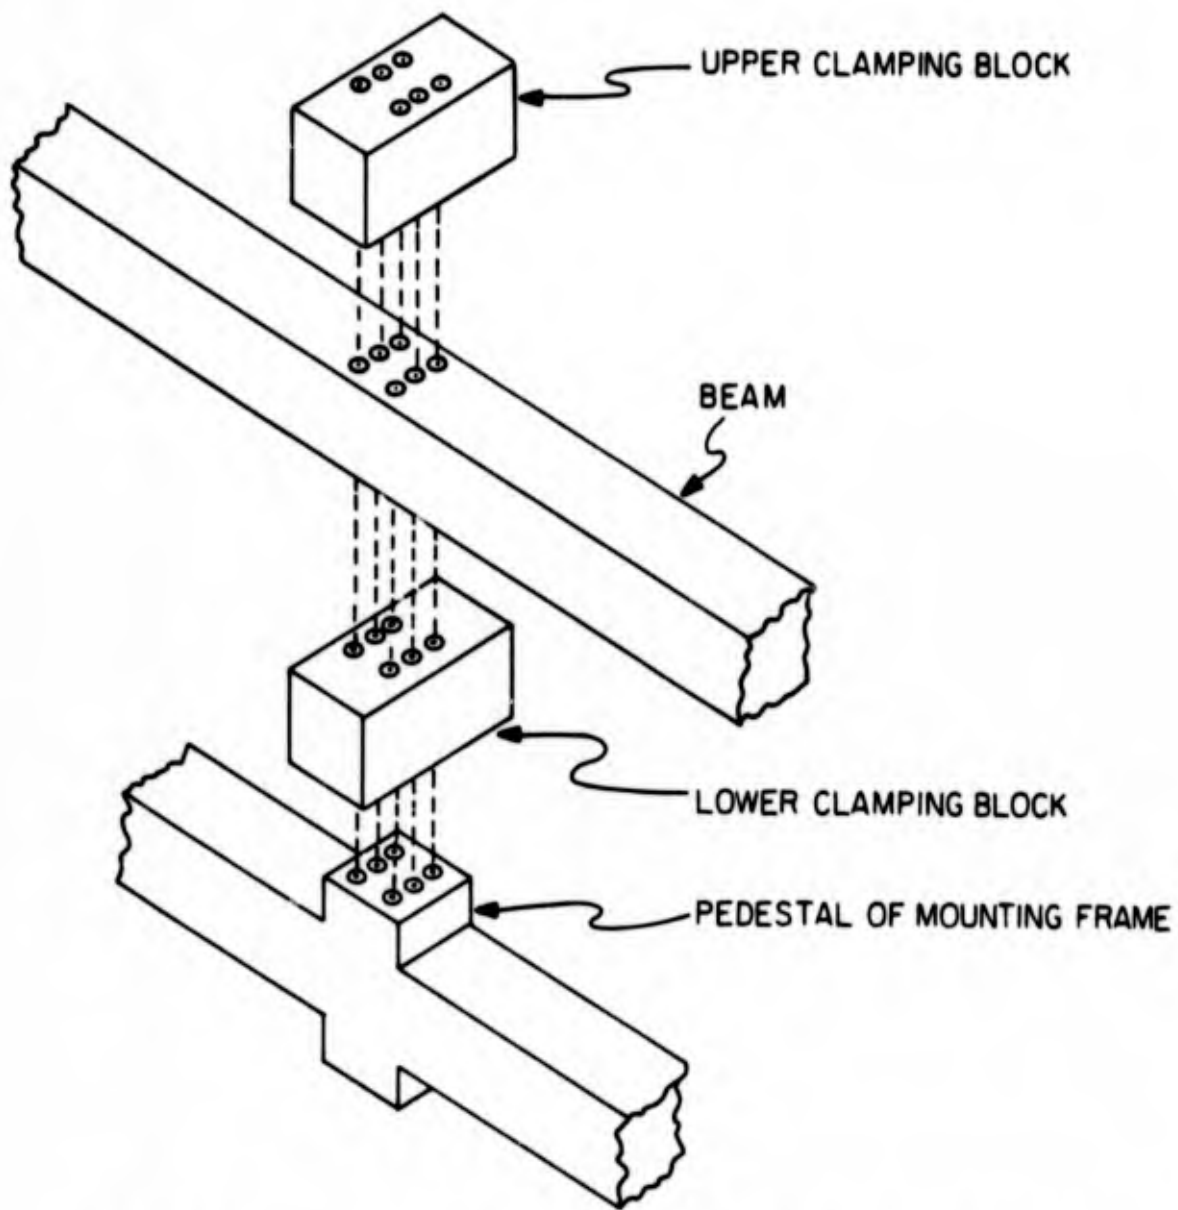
Isometric view of clamping blocks, beam, and pedestal
